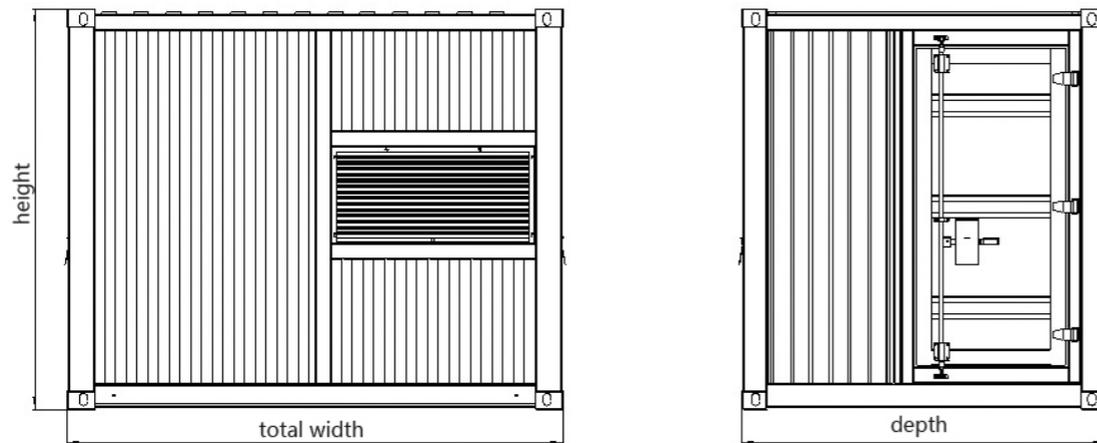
Dimensional Drawing of G40-10kV-Outdoor-Air Cooling FGSVG-C0.5/10-O
